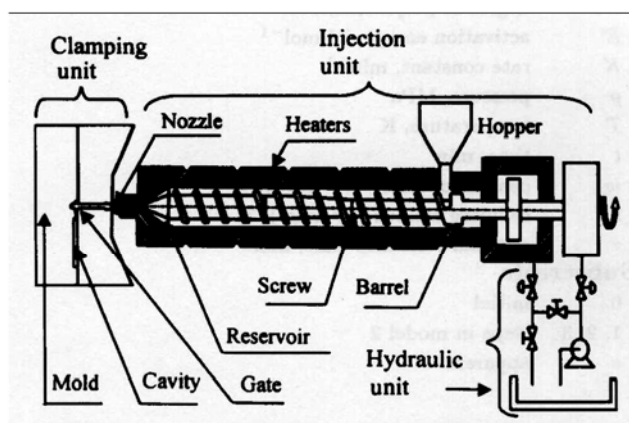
A simplified schematic of a modern reciprocating screw injection molding machine
